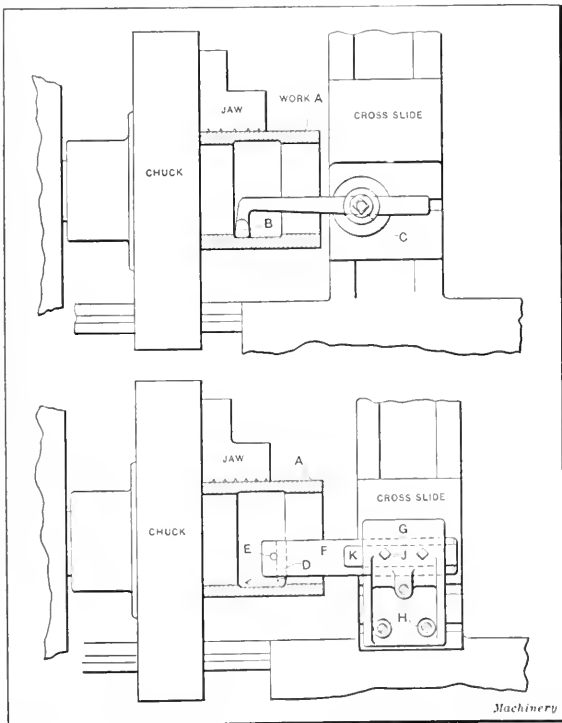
Two Simple Types of Recessing Tools for the Engine Lathe
